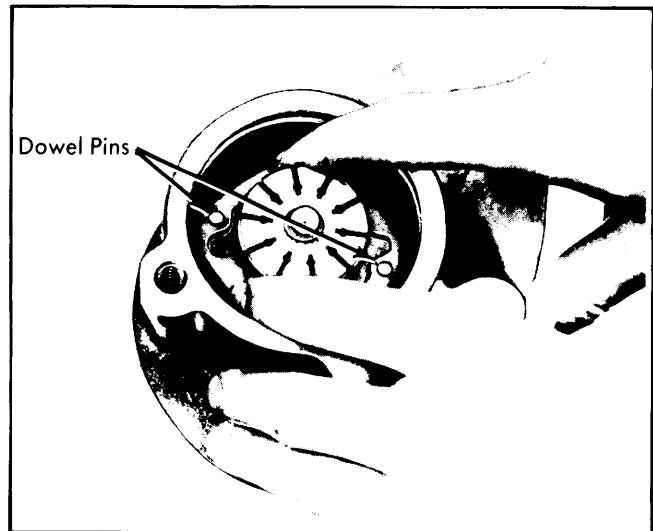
Installing Drive Shaft Assembly and Aligning Location Holes with Dowel Pins
